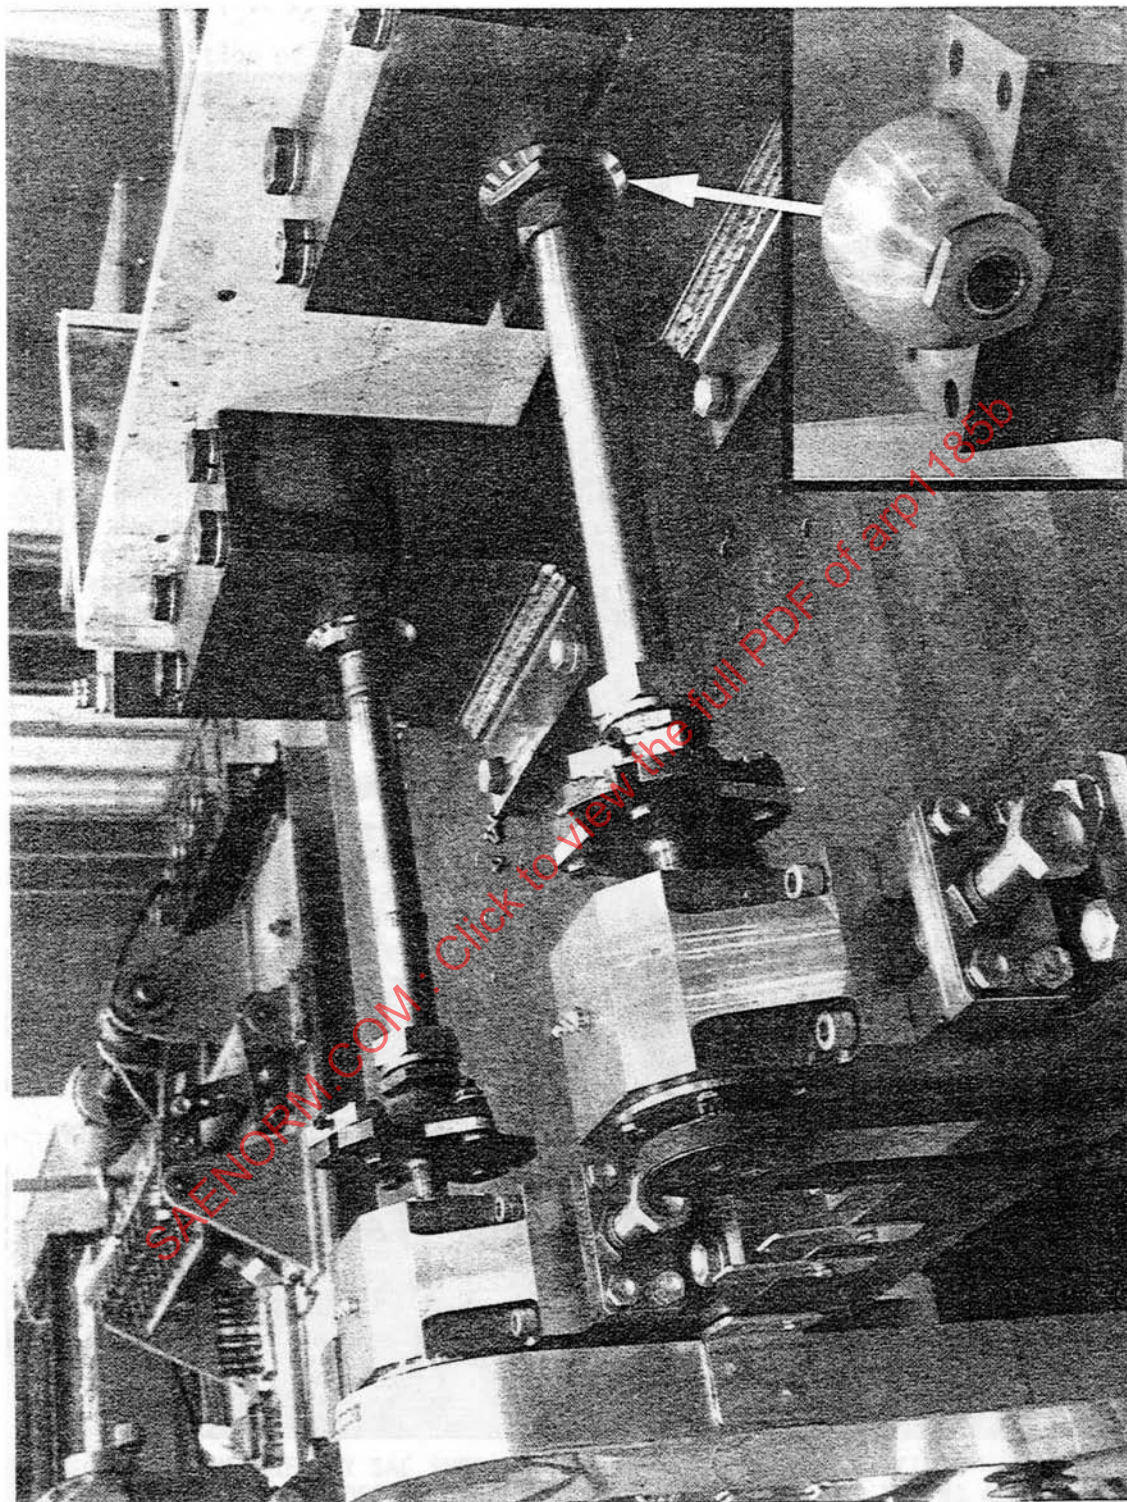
Example of Possible Heavy Duty Machine for Tube Sizes 0.750 in and Larger
